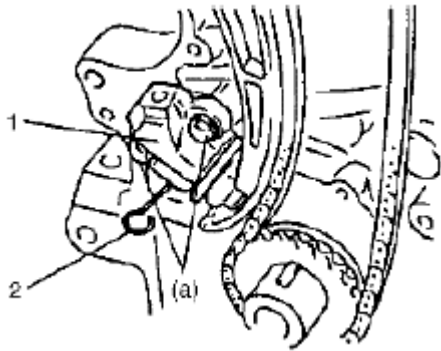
Identifying Timing Chain Tensioner Adjuster No. 1 & Stopper
